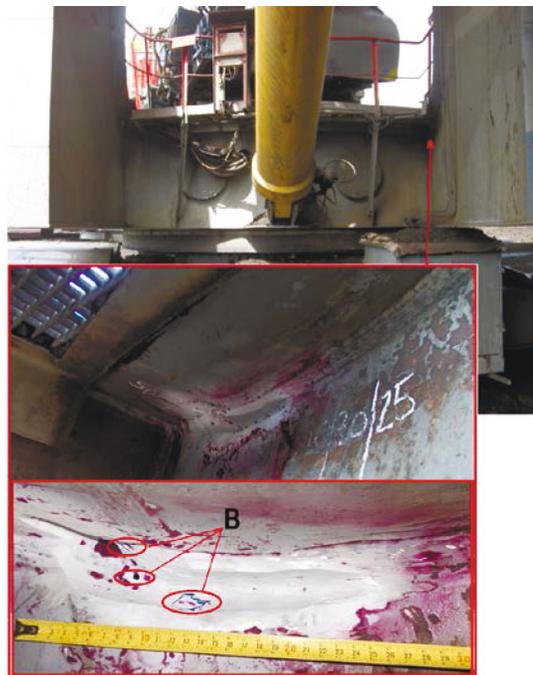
Grinded fillet weld at the left column of the P frame (detail A at Fig. 10).
